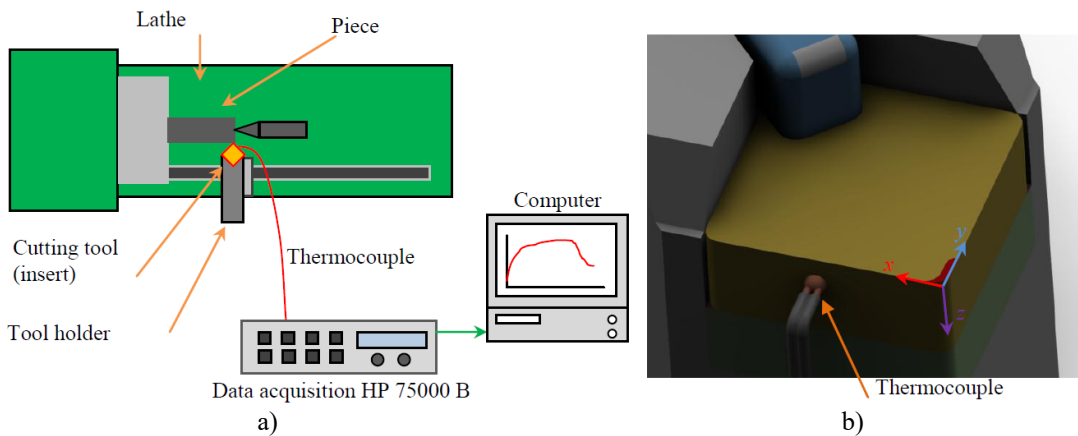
a) Experimental apparatus used to acquire the temperature signals in the tool during machining and b) detail of the position of the thermocouple welded to the tool.
